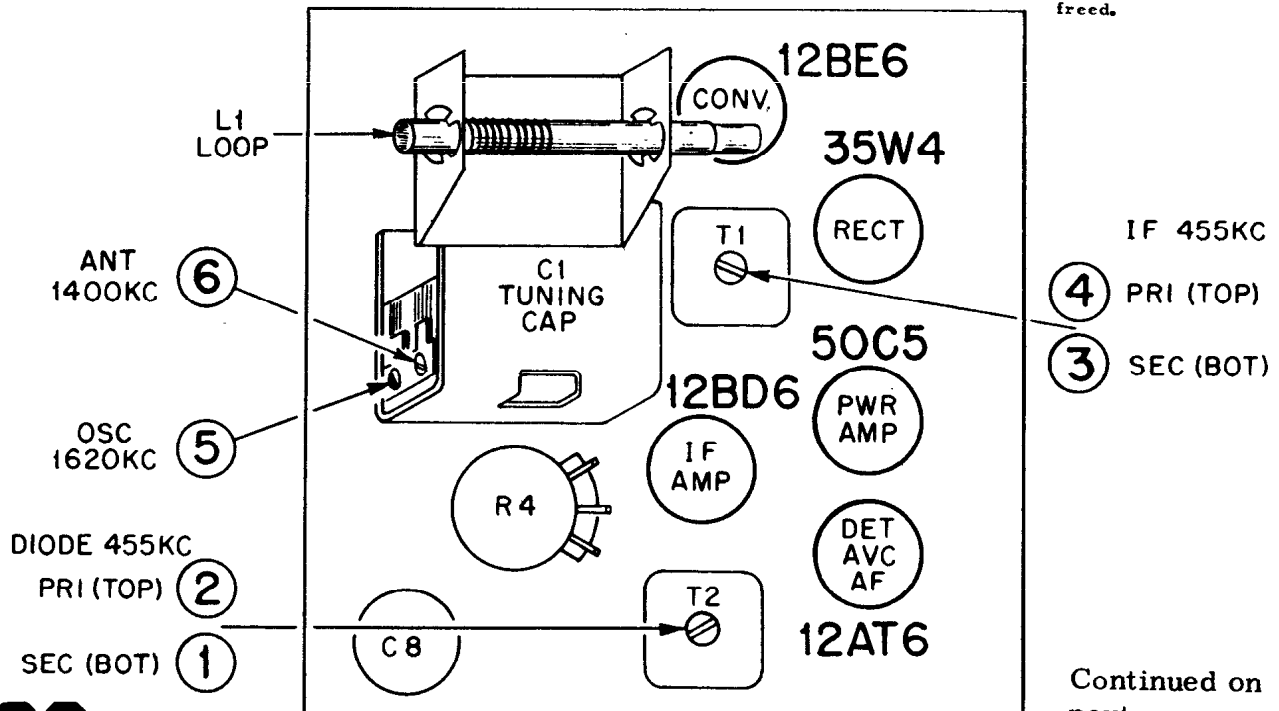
TUBE AND TRIMMER LOCATIONS (LATE MODEL)
